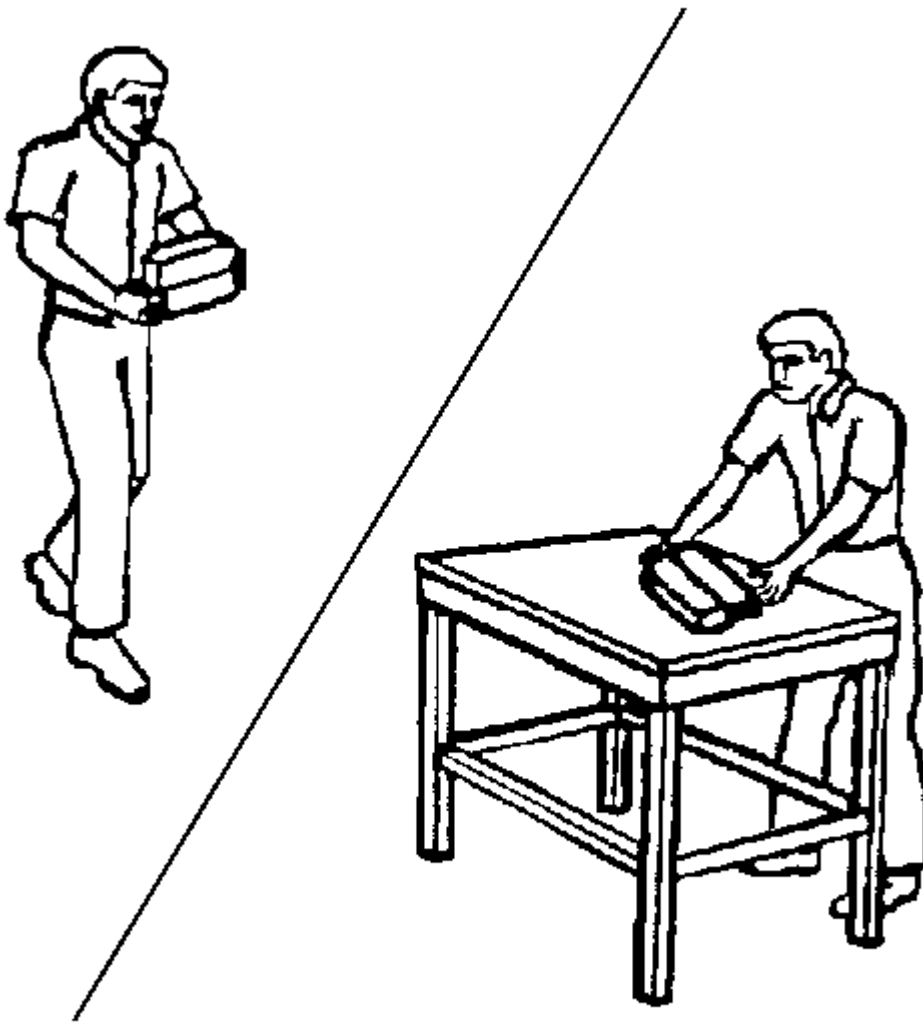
View Of Proper Handling Of Undeployed Inflator Module
